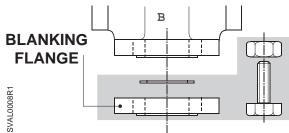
MXF461...U Flanged Valves in Straight-through Applications.
